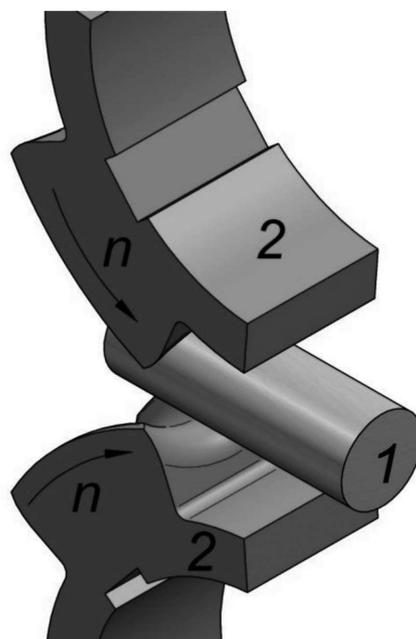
Geometrical model of the forge rolling process: 1 – billet, 2 – rolling segments
